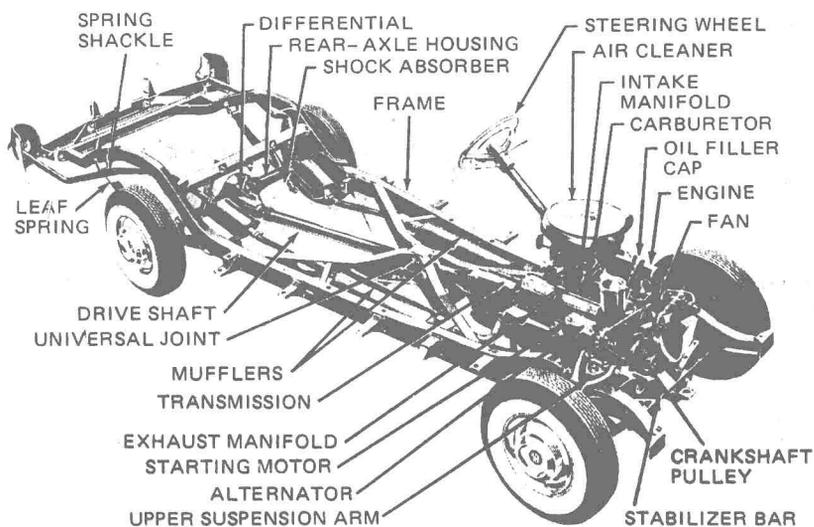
Chassis of a passenger car. The chassis contains the source of power; the frame, which supports the engine, wheels, and body; the power train, which carries the engine power to the rear wheels; and the steering and braking systems (Cadillac Motor Car Division of General Motors Corporation)
